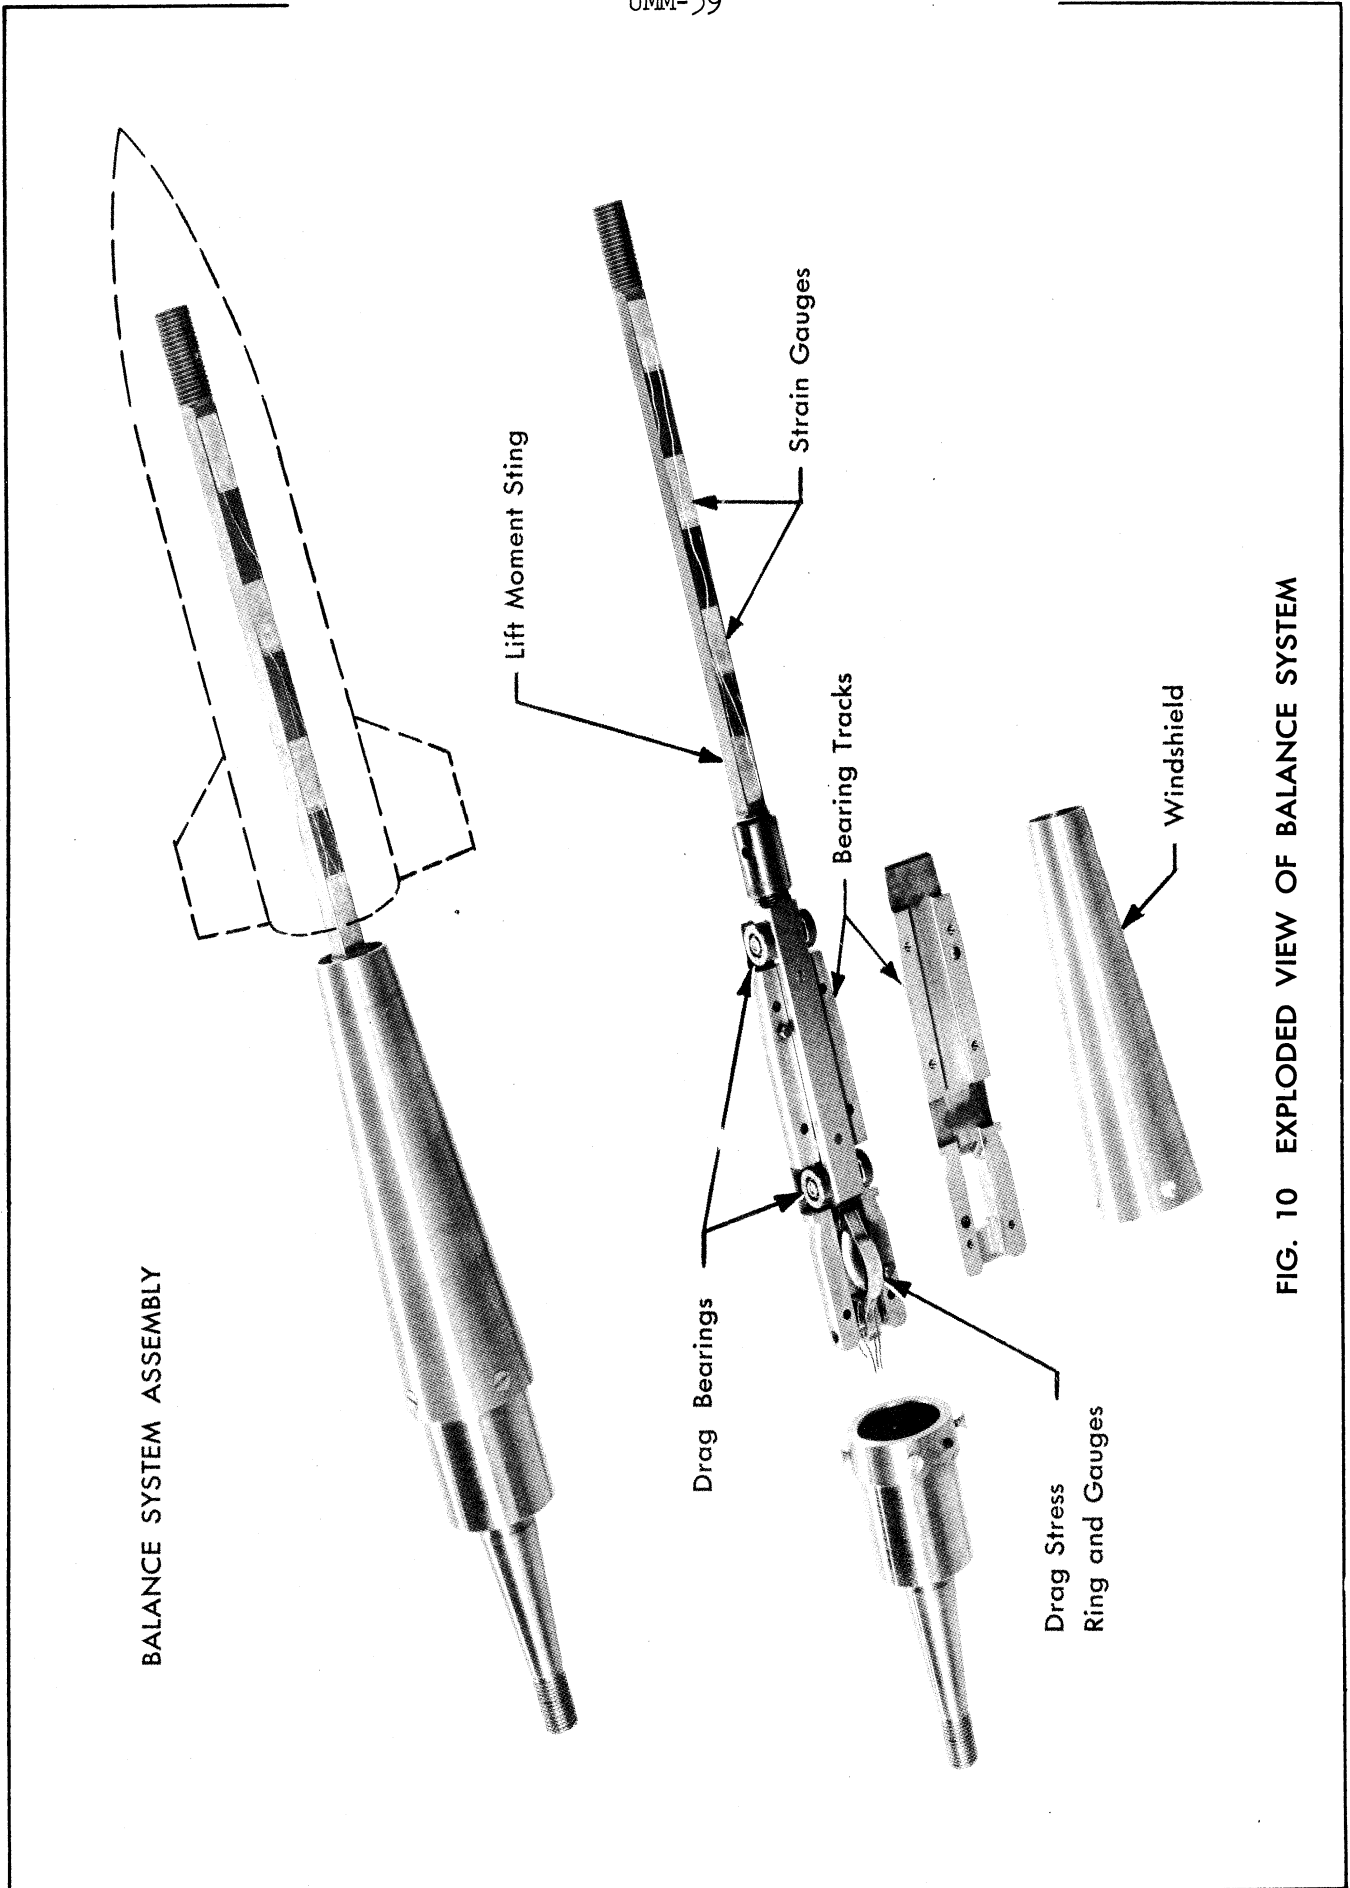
EXPLODED VIEW OF BALANCE SYSTEM
